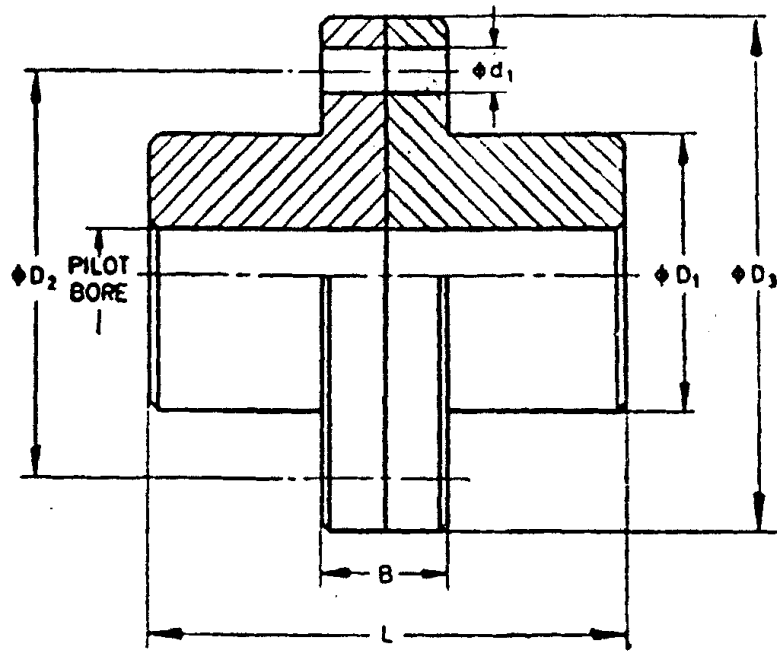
DIMENSIONS OF FLANGED COUPLING (RIGID)
